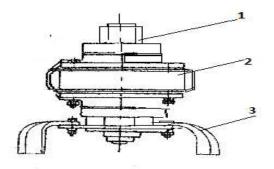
Rotor of section 1: shaft. 2-body. 3-knife 513
